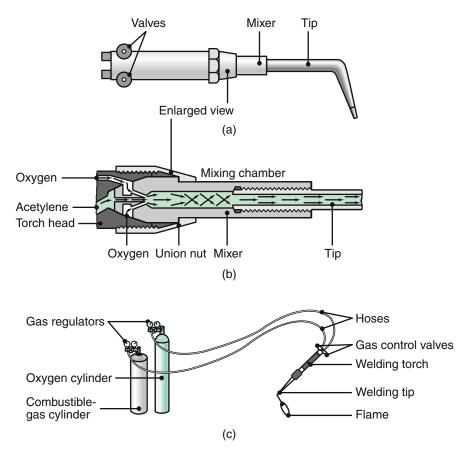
(a) General view of, and (b) cross section of, a torch used in oxyacetylene welding. The acetylene valve is opened first. The gas is lit with a spark lighter or a pilot light. Then the oxygen valve is opened and the flame adjusted. (c) Basic equipment used in oxyfuel–gas welding. To ensure correct connections, all threads on acetylene fittings are left handed, whereas those for oxygen are right handed. Oxygen regulators usually are painted green and acetylene regulators red.
